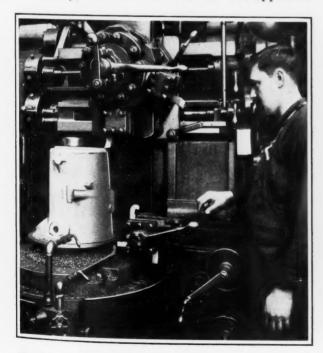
Finish-turning and Facing Flange of Transmission Case, Rough-boring, and Roughing and Finishing Rear End; Pieces Machined per Grind: Roughing, 75
